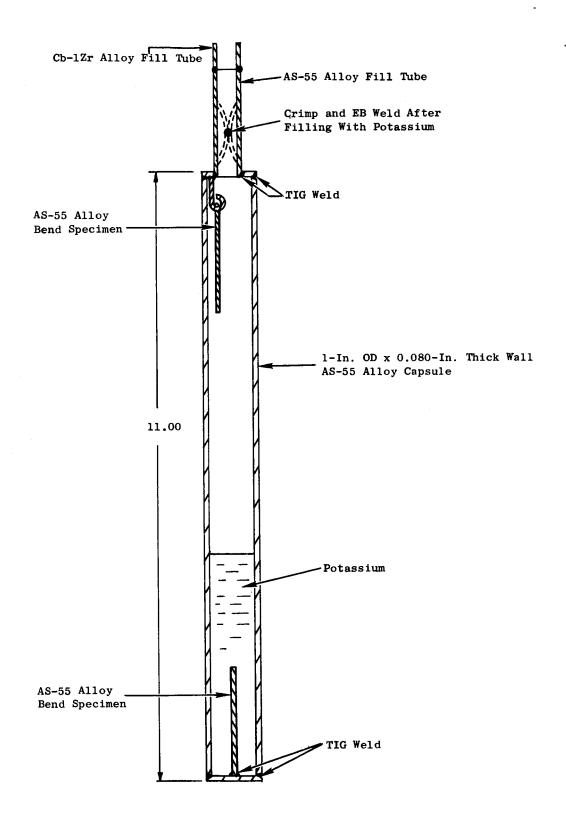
AS-55 Alloy Reflux Corrosion Capsule Showing Fill Tube and Location of Bend Specimens.
